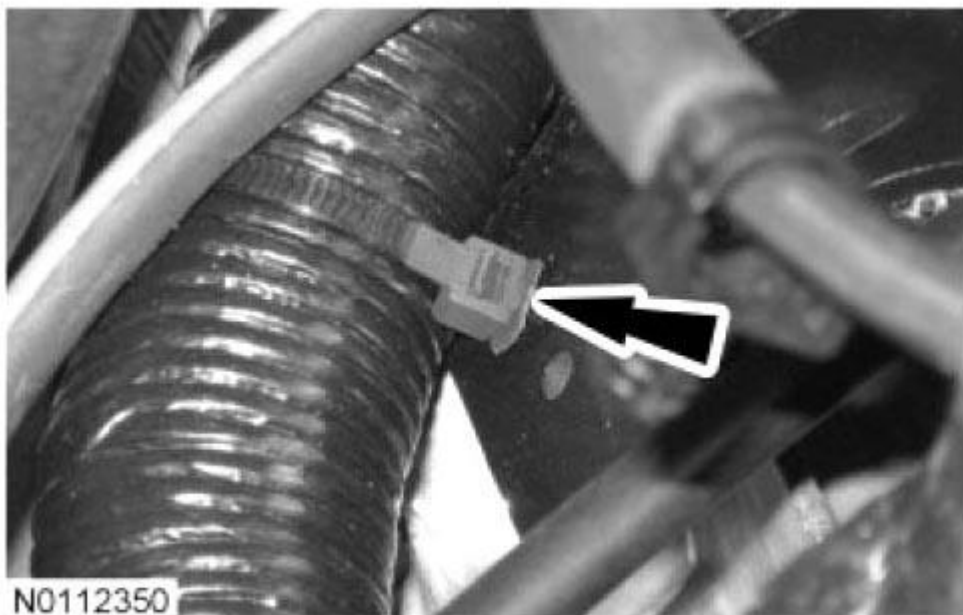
Locating Wiring Harness Retainer To Selector Lever Cable Bracket
